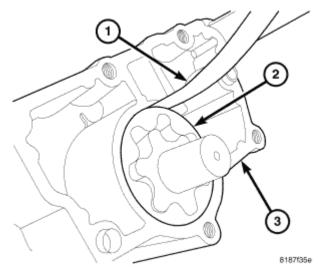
SPROCKET REMOVAL Courtesy of CHRYSLER LLC
